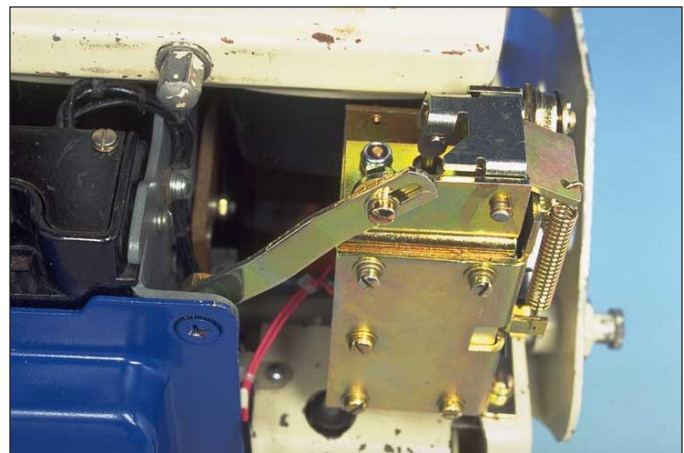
DTA Cross Brace Secured to the Breaker and DTA Assembly
